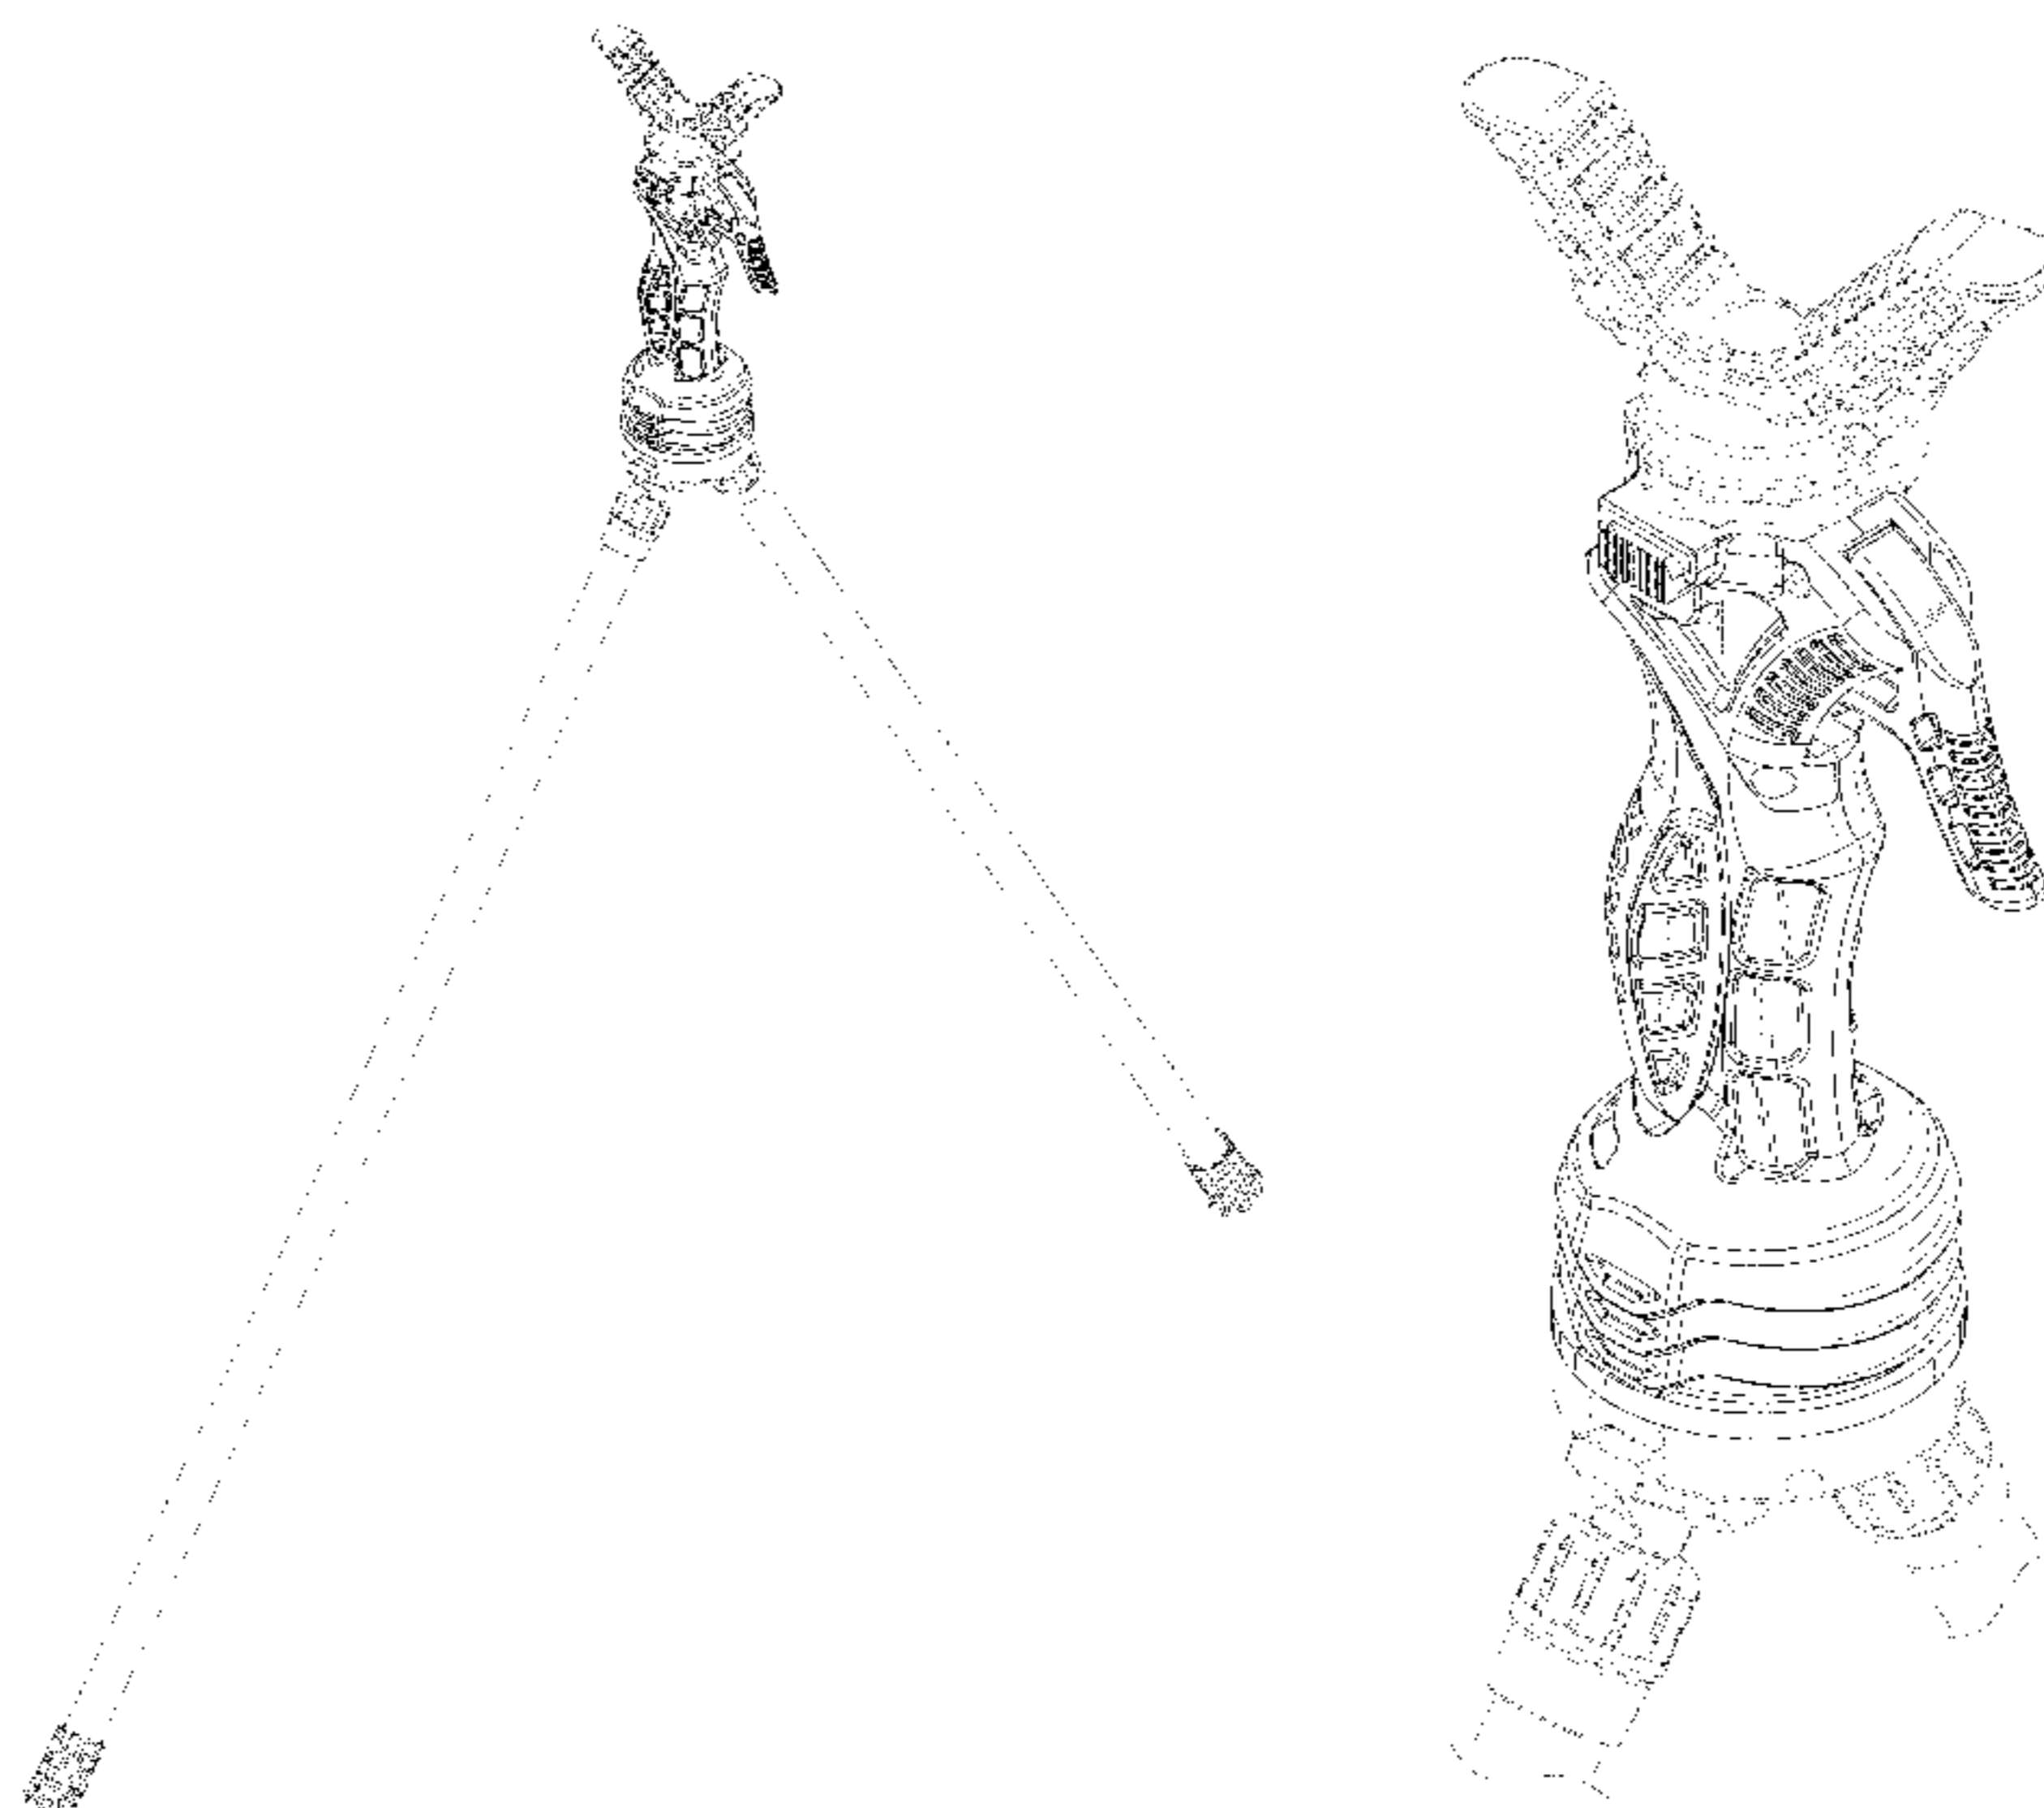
is a perspective view of a trigger stick assembly according to the present disclosure.
